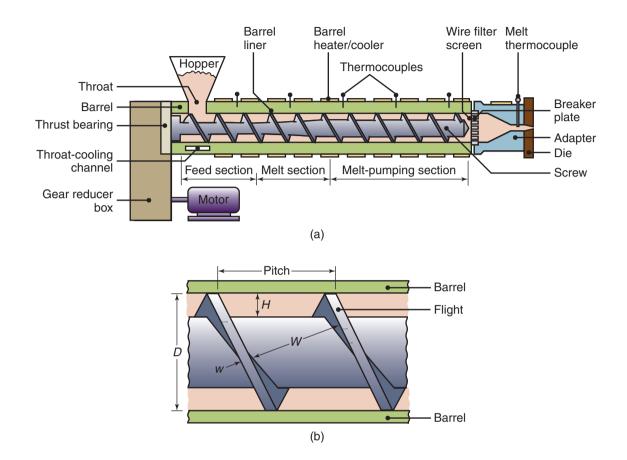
Common extrusion die geometries: (a) Schematic illustration of a typical screw extruder. (b) Geometry of an extruder screw metering or pumping section. Complex shapes can be extruded with relatively simple and inexpensive dies.
